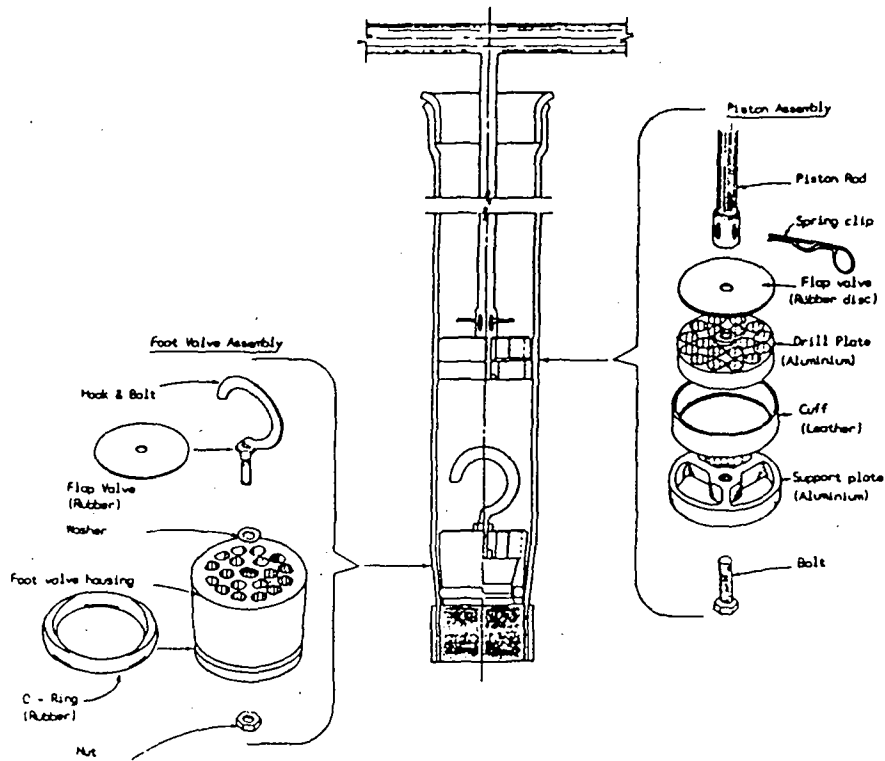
PISTON & FOOTVALVE, ASSEMBLY REQUIRES NO TOOLS
